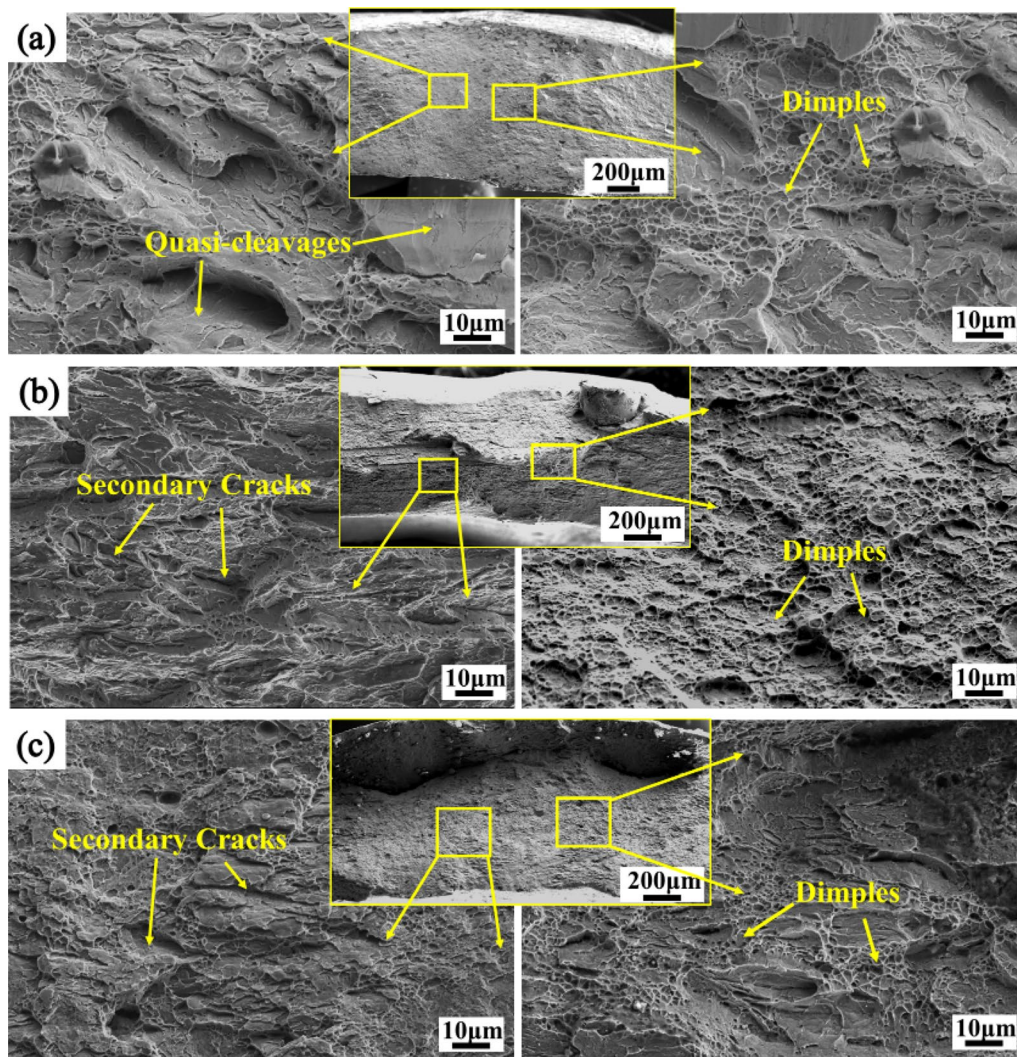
Fracture surfaces of Erichsen cupping test blanks of joints: a QP-DP joint, b QP-QP joint and c DP-DP joint
